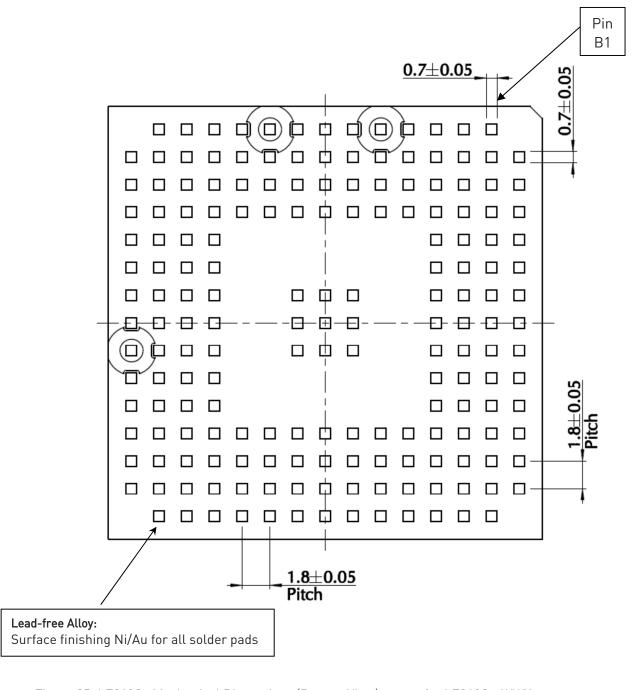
LE910Cx Mechanical Dimensions (Bottom View) except for LE910Cx-WWX
